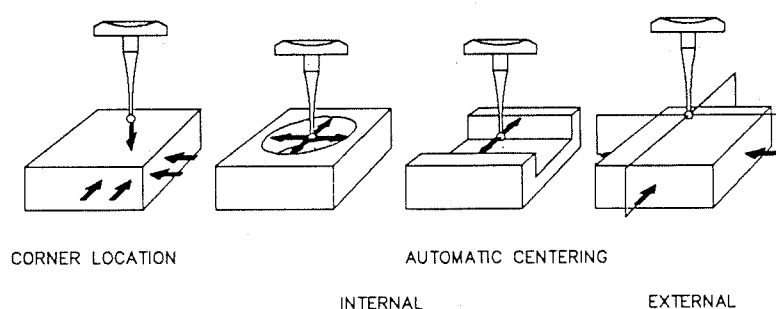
Measuring cycles for workpieces on die sinking Roboform machines.
